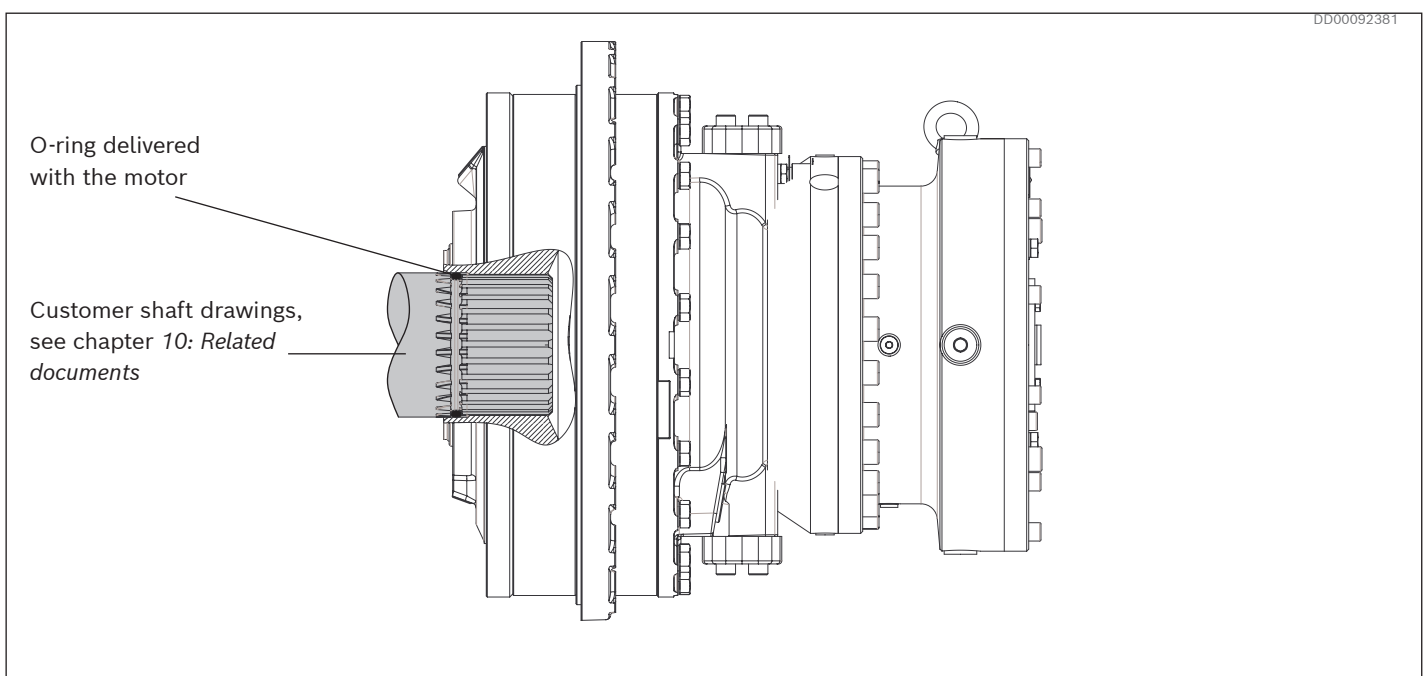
Example flange mounted CA motor with spline and BICA brake on customer shaft
